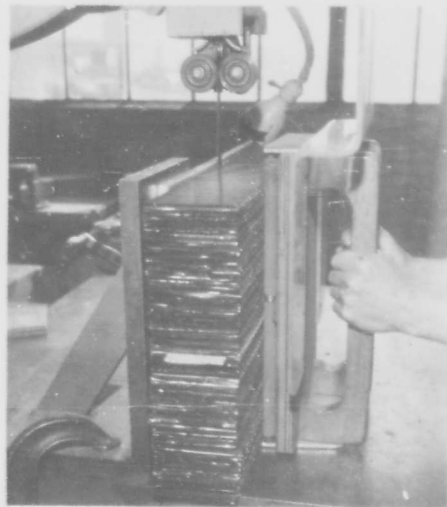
Sawing Billet of TZM Honeycomb Core with Diamond Blade
